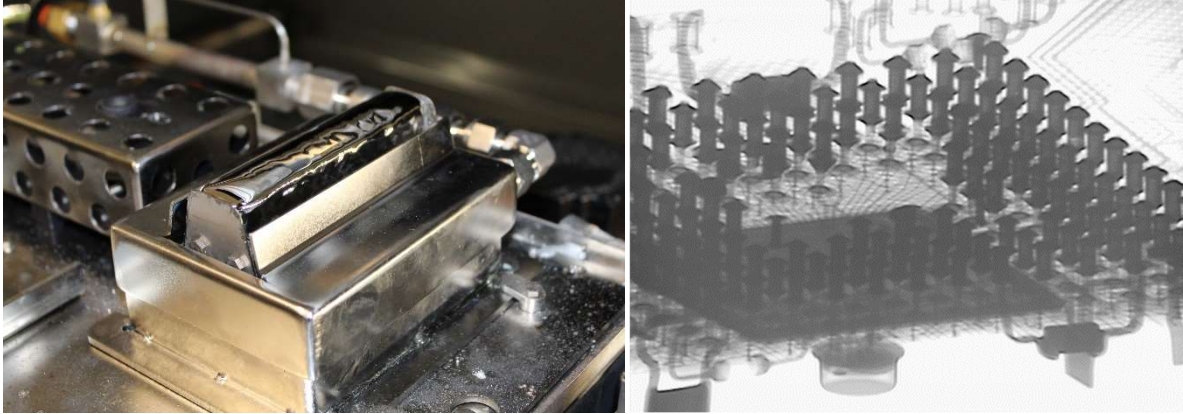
4" wide wave solder nozzle (left), and X-ray image of high mass PGA with complete PTH fill (right)
